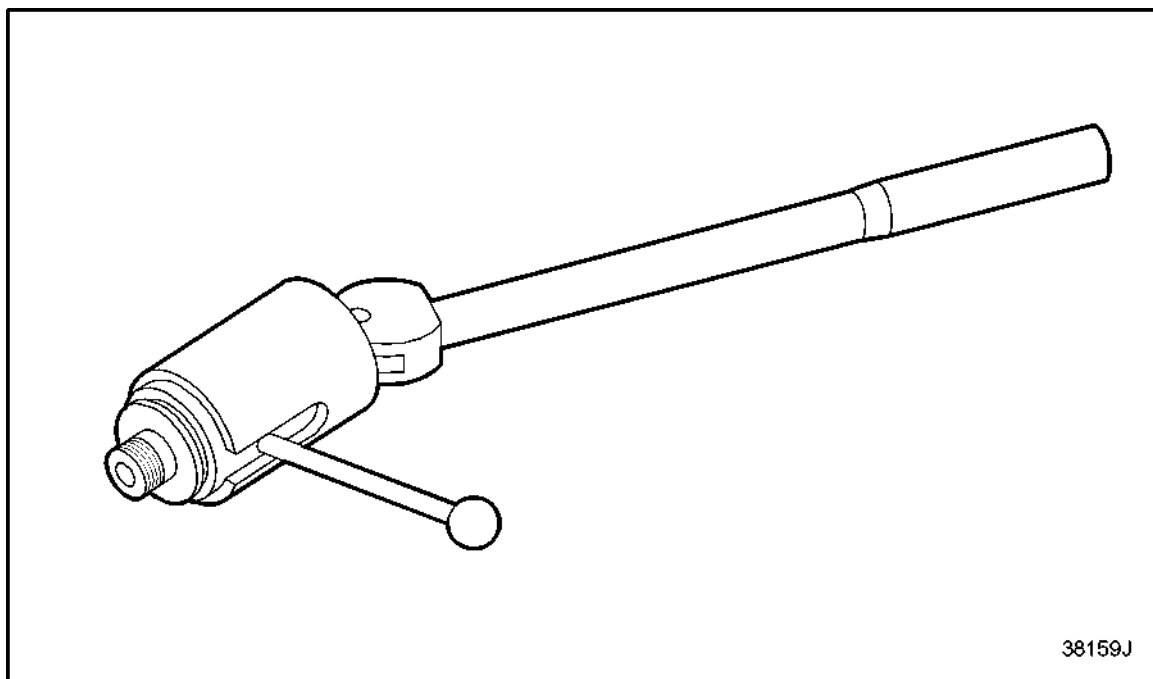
Valve Seat Insert Puller Assembly, J 23479-35
